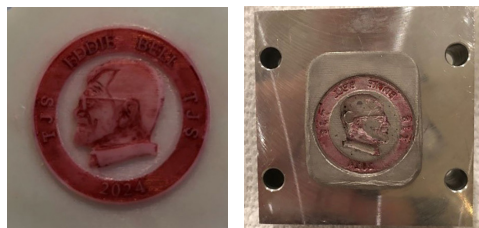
and 62: Resin prototype of coin (left) and soft metal mold pressed against a resin model (right)
